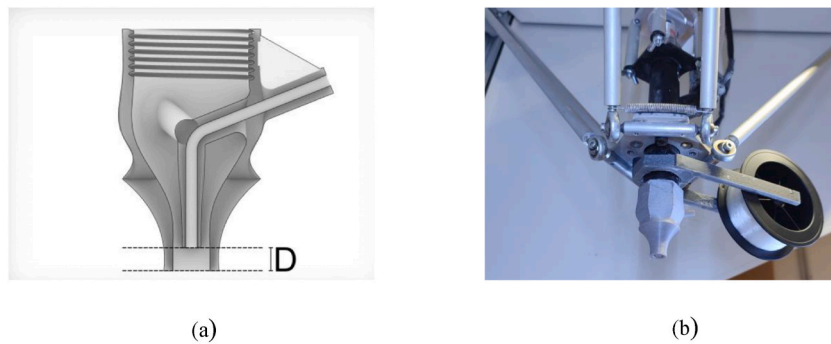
Nozzle design displayed as (a) sectional drawing and (b) mounting with spool holder [63].
